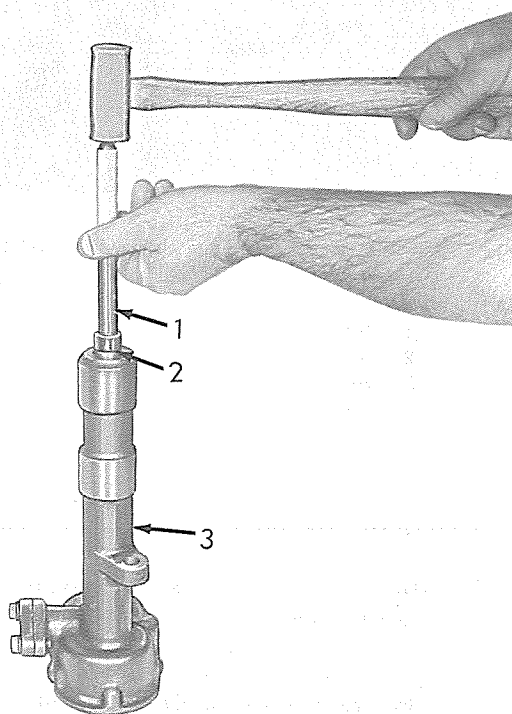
Installing Bushing in Oil Scavenging Pump Body (T-20232)
